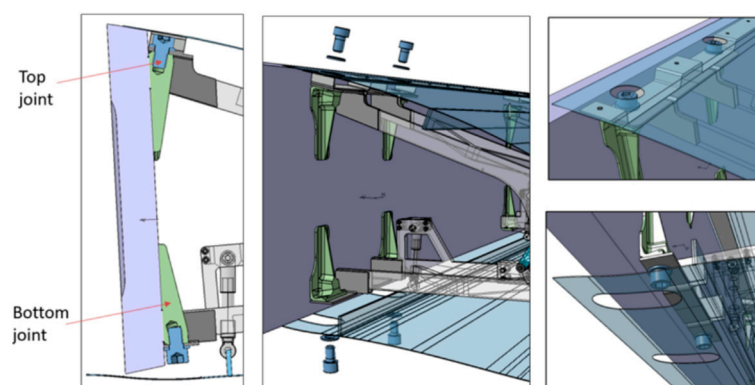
Bolted joint between MLE and front spar (left), cut-out areas at top and bottom of skin element (right) [28].
